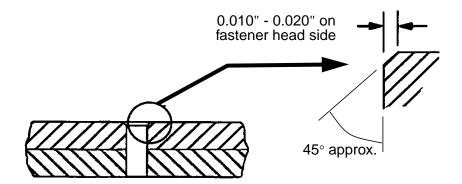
Edge Relief (Edge Break) for Protruding Head Fasteners
